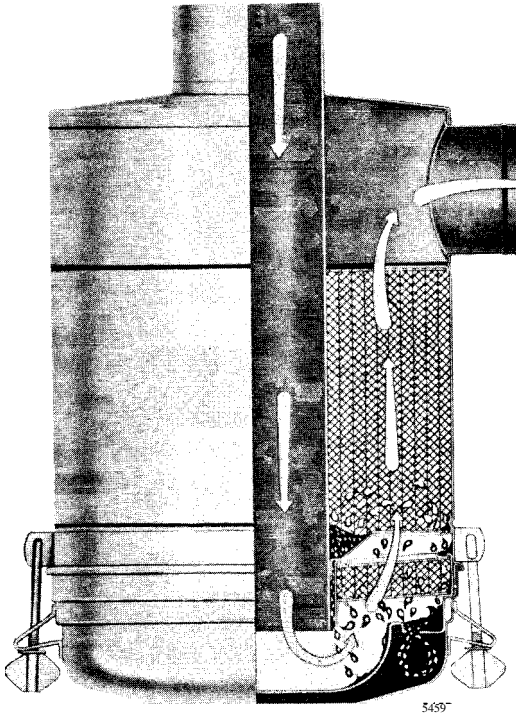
Air Flow Through Heavy Duty Oil Bath Type Air Cleaner
